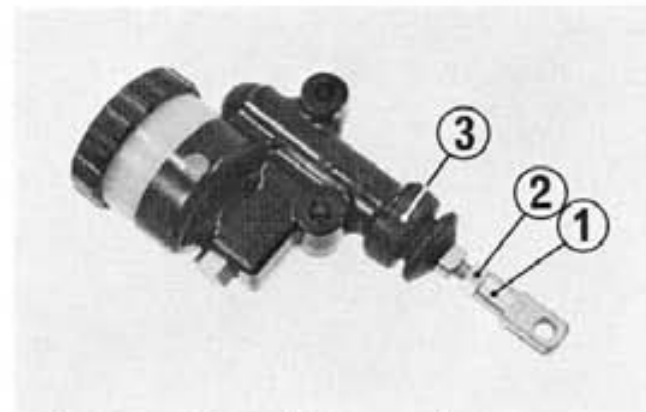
① Brake rod joint ② 8mm nut ③ Boot
